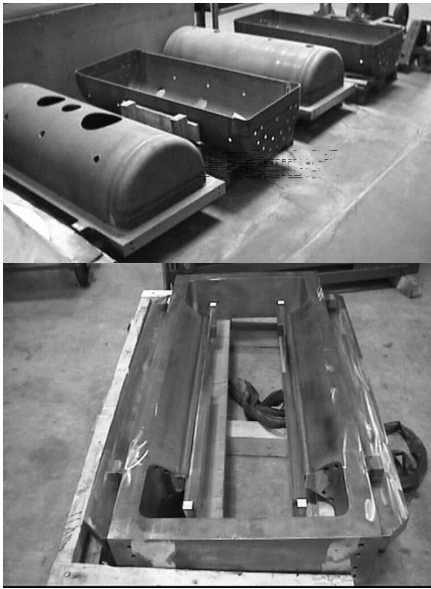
Half shells and center frame of the IH-structure before the final assembly at the company NTG.
